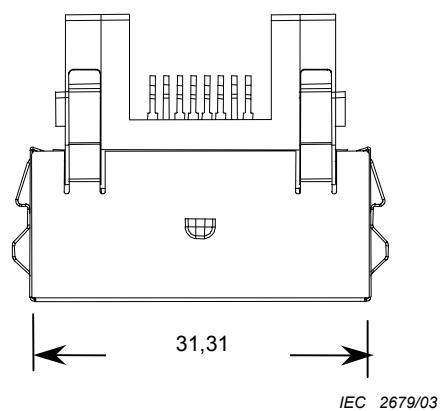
Top view fixed board connector (XB) straddle mount (version 2) (TB)
